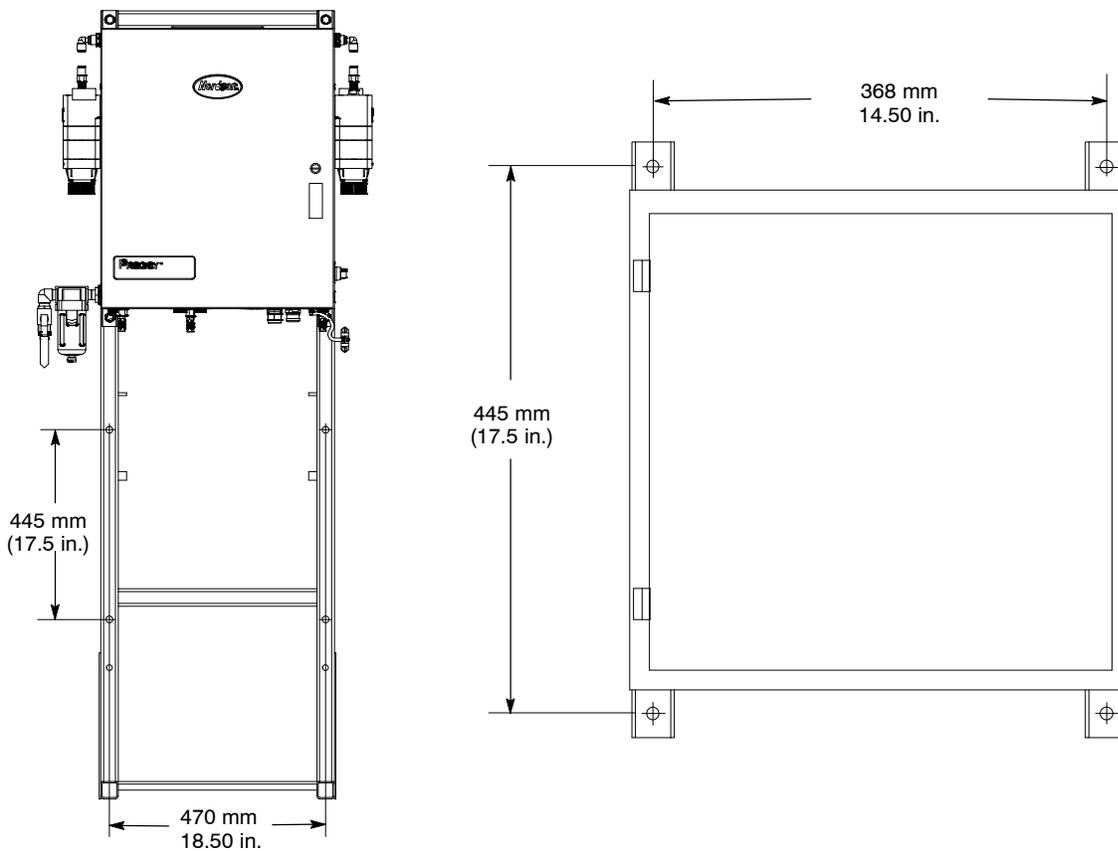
Gateway Mounting to Prodigy II Gun Stand
